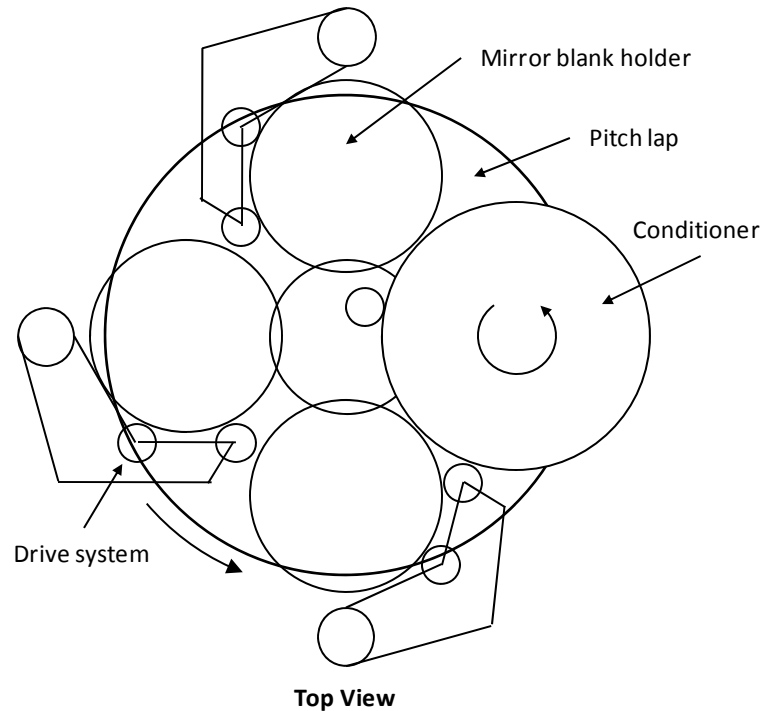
Top view diagram of the continuous polishing machine. The mirror parts continuously pass over the lap to get uniform wear on the surface.
